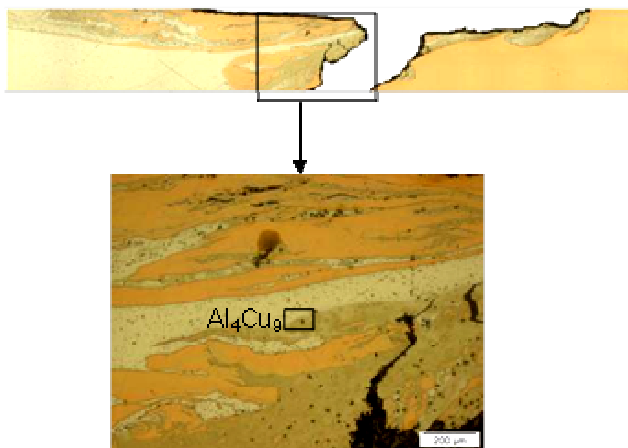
(a) Fractured surface of weld produced at 950 rpm and 50 mm/min with the 15 mm shoulder diameter tool
